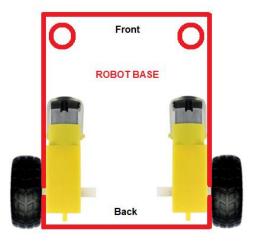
DC-GEARED MOTOR TO CHASSIS (TYPE A)
